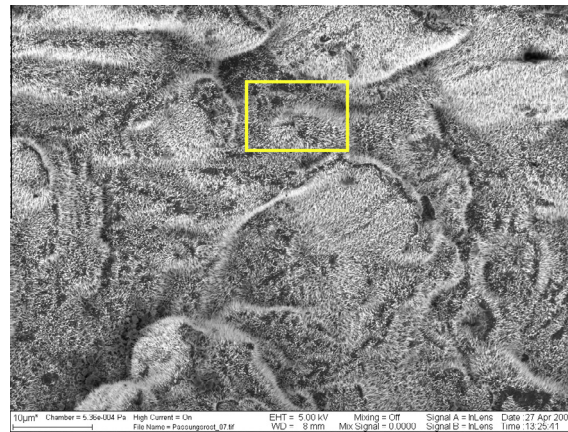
Part of the fatigue fracture surface of a comparative component test after annealing. The crack surface is coated with small iron oxide whiskers grown during heat treatment in a furnace with ambient atmosphere.
